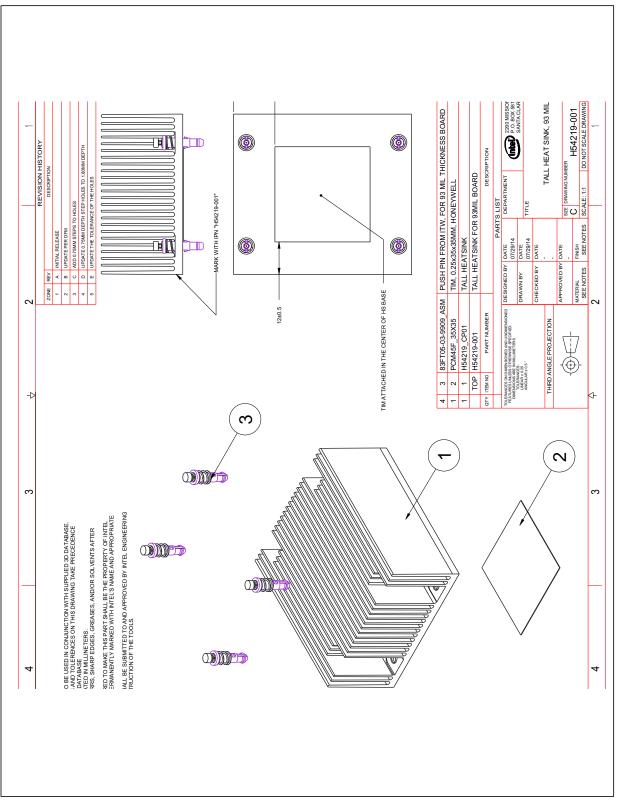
H54219 - Reference Heatsink Assembly Drawing - Sheet 1 of 2
